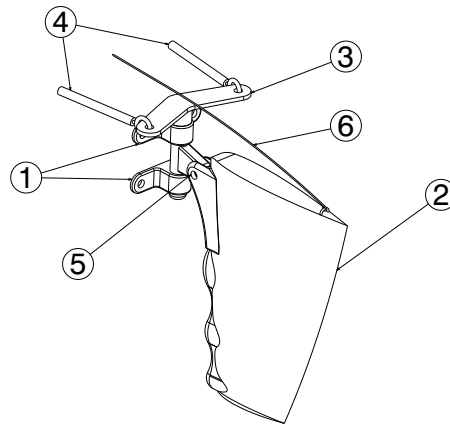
Schematic of the rudder mechanism, highlighting: 1.Attachments, 2.Rudder, 3.T-lever, 4.Control cables, 5.Hinge point, 6.Retraction cable.
